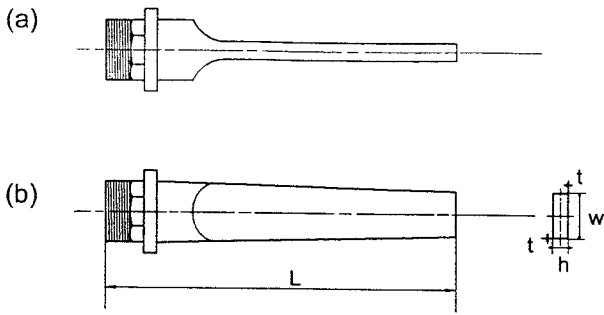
Rectangular nozzle configuration. (a) Side view, (b) Top view
